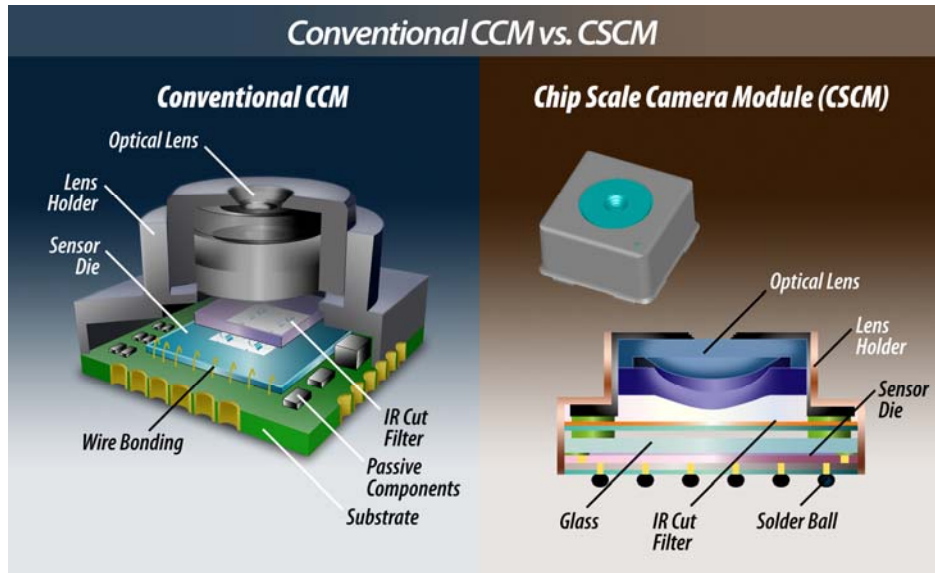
Image sensor in CCM and CSCM camera module assemblies [54].
